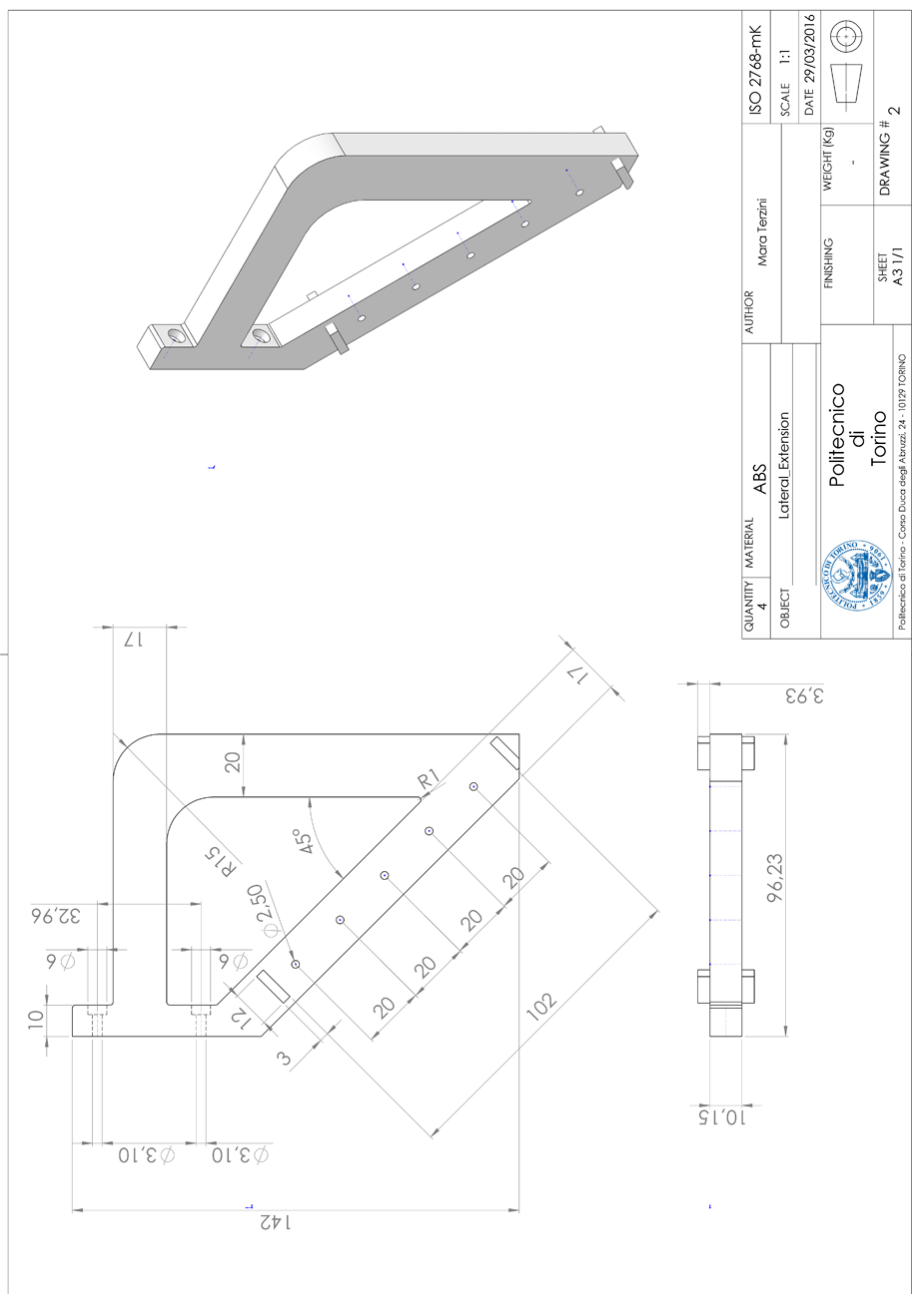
Lateral Extension drawing. The lateral extensions are included both in the upper and in the lower crossheads.
